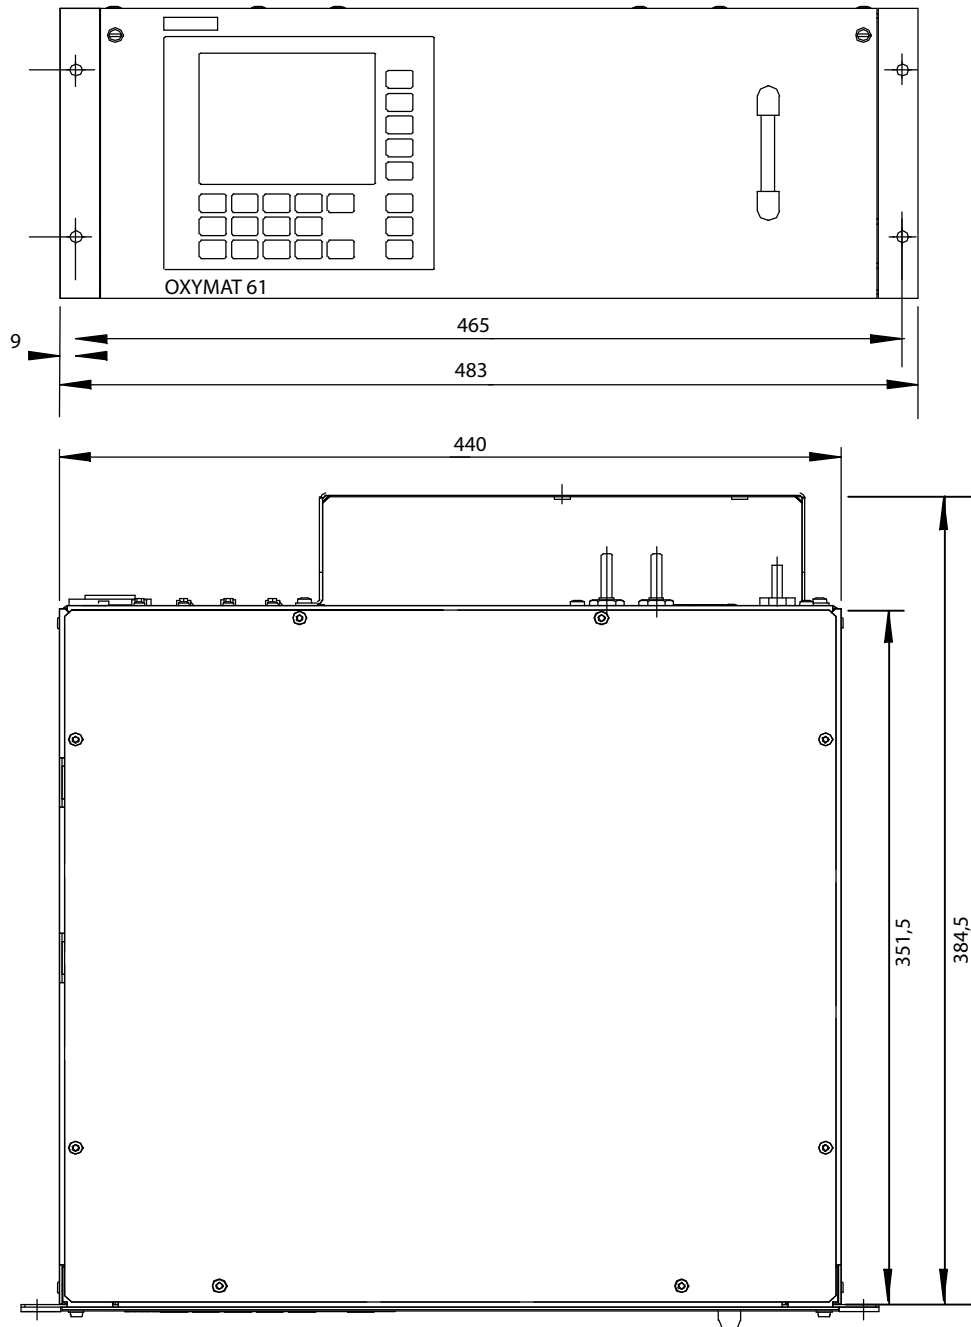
Dimensions for preparing installation (in mm) (front view and plan view)
